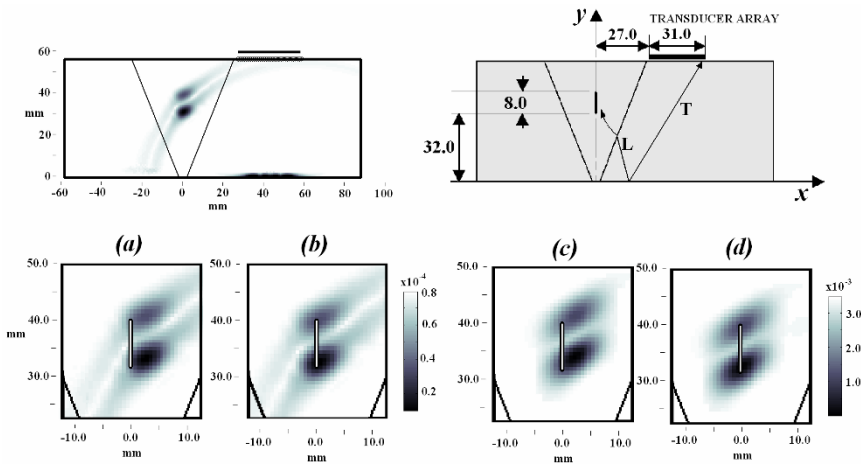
Imaging of a crack using full-skip TLLT inspection. A typical simulated SAFT image and the weld geometry and the crack location are shown, along with: (a) SAFT image using incorrect delay laws, (b) SAFT image using correct delay laws, (c) TFM image using incorrect delay laws and (d) TFM image using correct delay laws.
